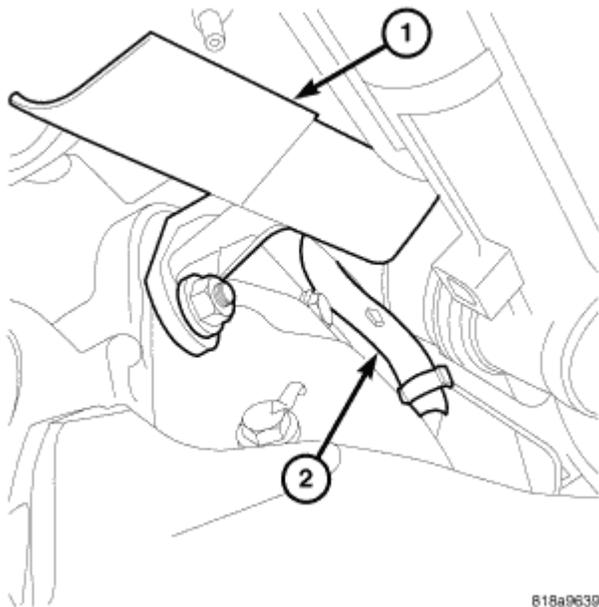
Identifying Oil Filter Drain Tray & Vent Hose
